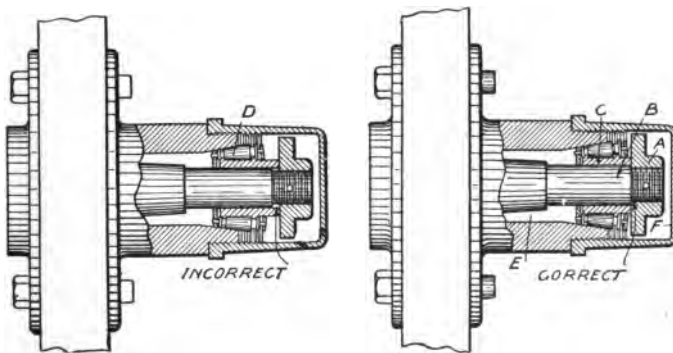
Timken Roller Bearing as Used in Franklin Car.
